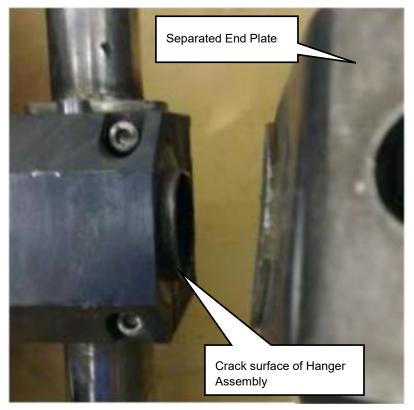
Close-up of weld failure. Photo Reference: Cameron Balloons SB 28 Rev 0
